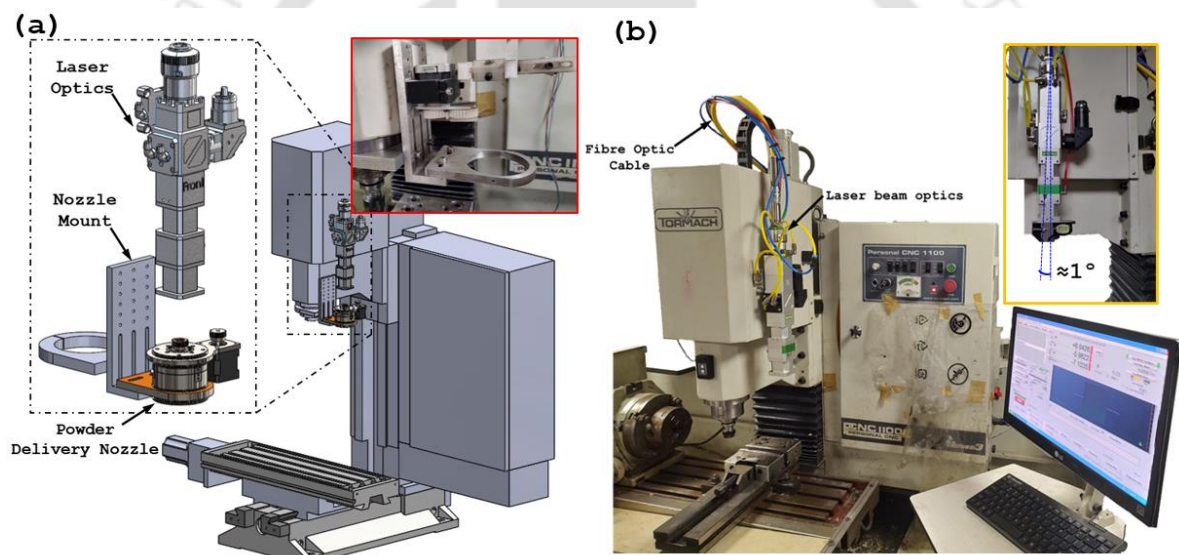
Mounting of laser optic on the CNC Mill (a) CAD model and (b) optics mounted on the CNC mill with a small inclination with the vertical
